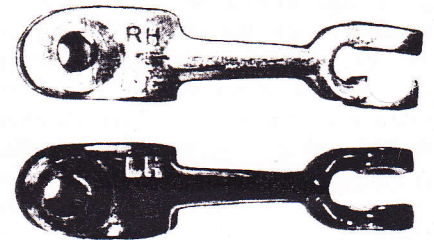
Emergency brake levers are marked right and left and should not be mixed.
